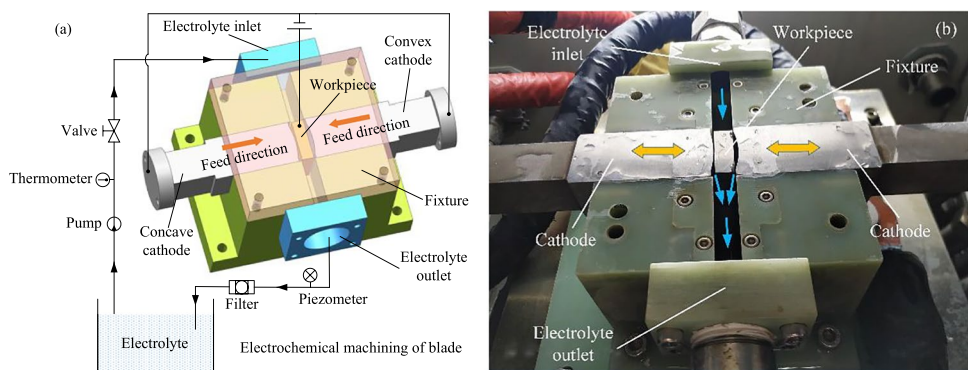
ECM fixture for forged TiAl 4822 blade: a 3D model and b physical picture
